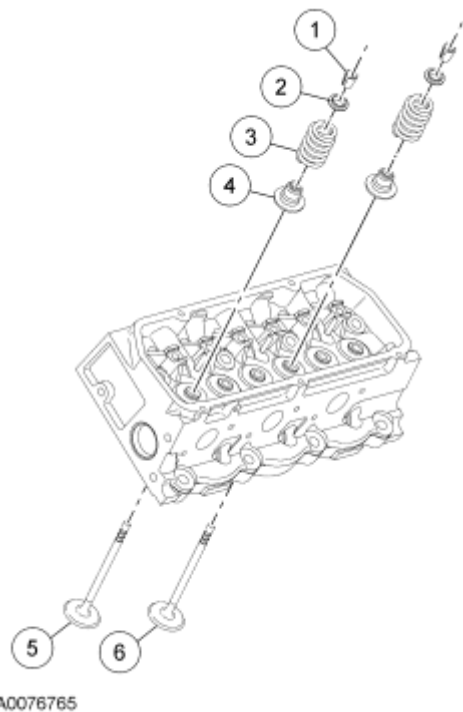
Identifying Valve Spring Retainers, Valve Springs And Valves
